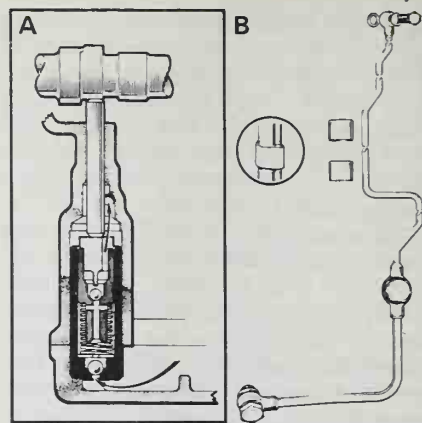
A self regulating plunger-type oil pump is used. An external pipe (B) carries oil to flywheel end main bearing and cylinder head. Gears, governor camshaft and underside of piston are splash lubricated.
